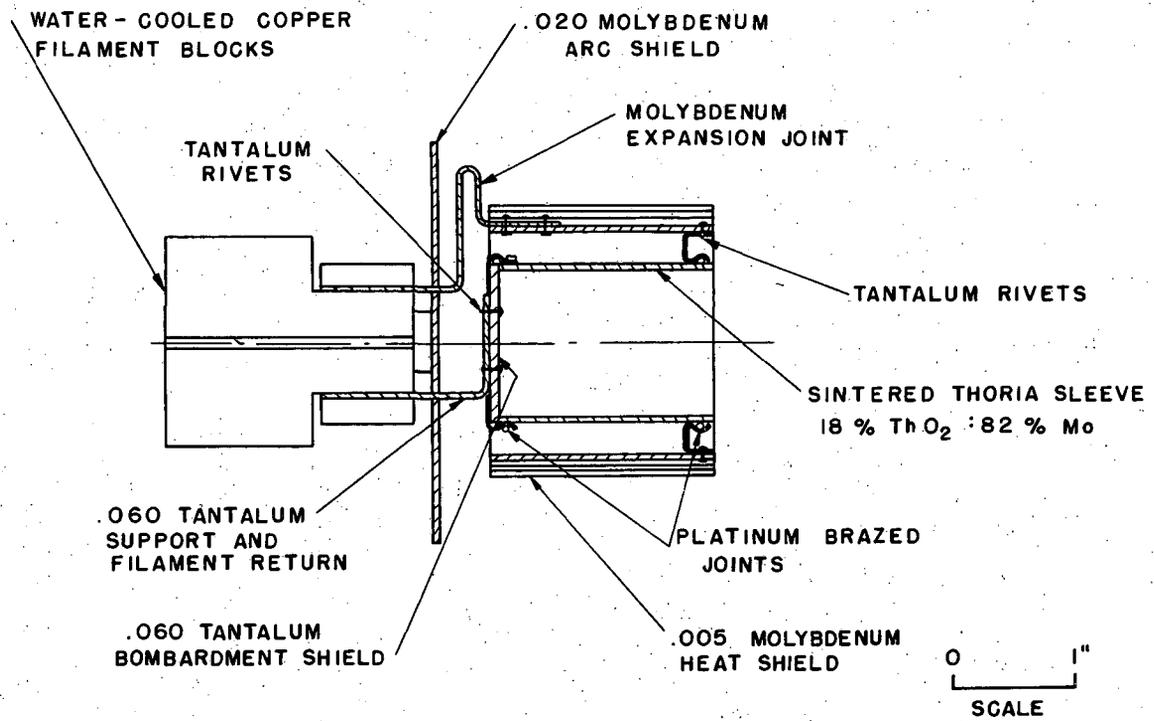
ASSEMBLY-SINTERED THORIA INTERNAL EMITTER DIRECTLY HEATED
